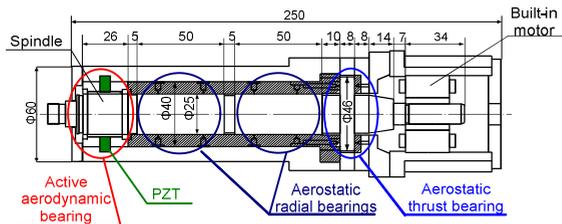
Hybrid air-bearing spindle employing aerostatic radial /thrust bearings and active aerodynamic radial bearing
